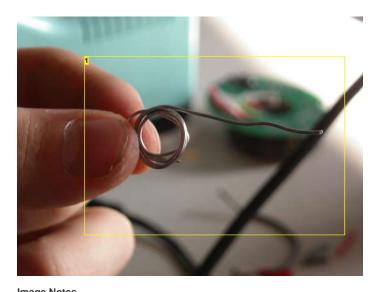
Mitch likes to coil his solder with a short lead to hold it steady while he solders.
